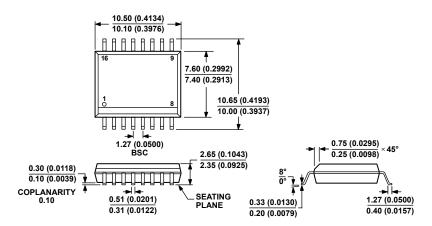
16-Lead Standard Small Outline Package [SOIC\_N] Narrow Body (R-16) Dimensions shown in millimeters and (inches)
